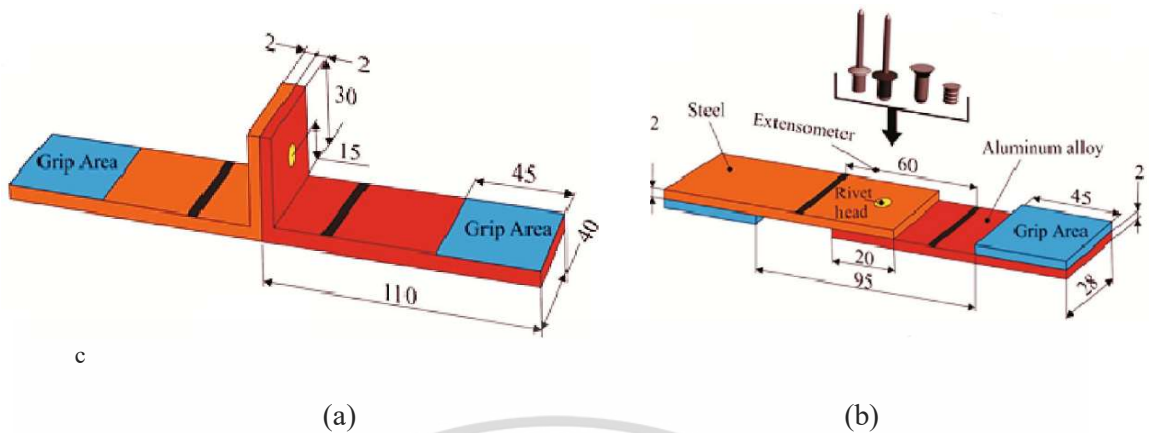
The specimen geometry and the rivet position in the hybrid connection:
